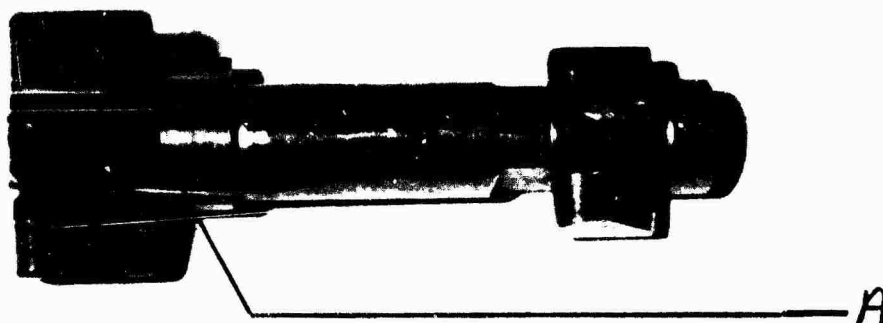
Location of Crack in Bolt (Part No. 22) Observed
